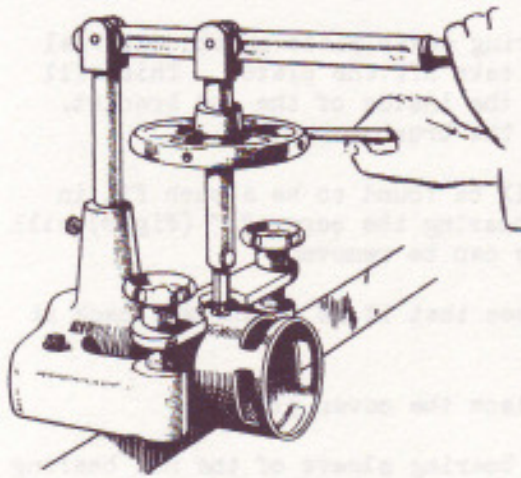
SHOWING TIGHTENING POLE SHOES WITH WHEEL OPERATED SCREWDRIVER.
